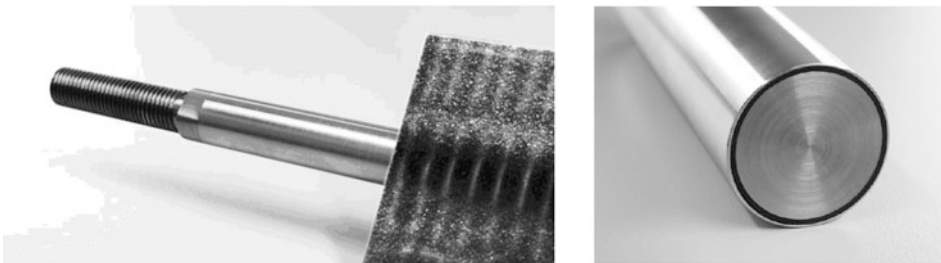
Image of a dimensional body on a rod (Factory photo: Magnopol GmbH & Co. KG)
